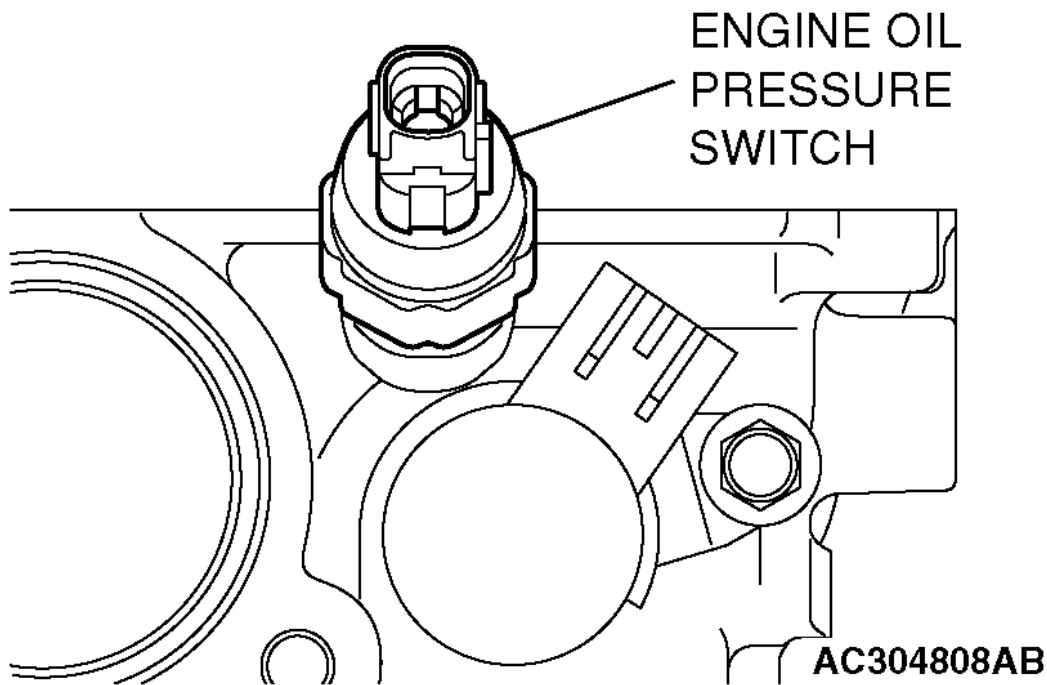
Tightening Engine Oil Pressure Switch To Specified Torque
